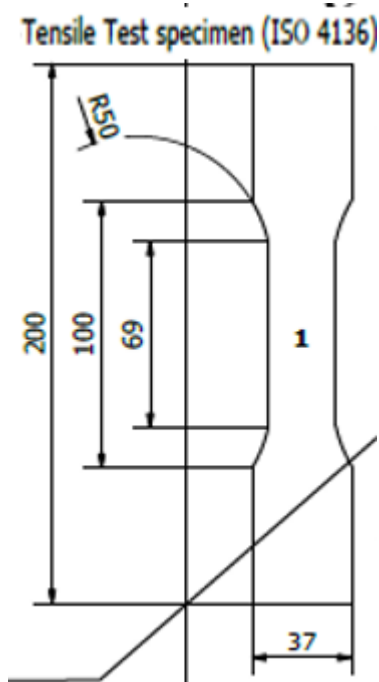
Dimension of tensile testing specimens according to ISO 4136.
